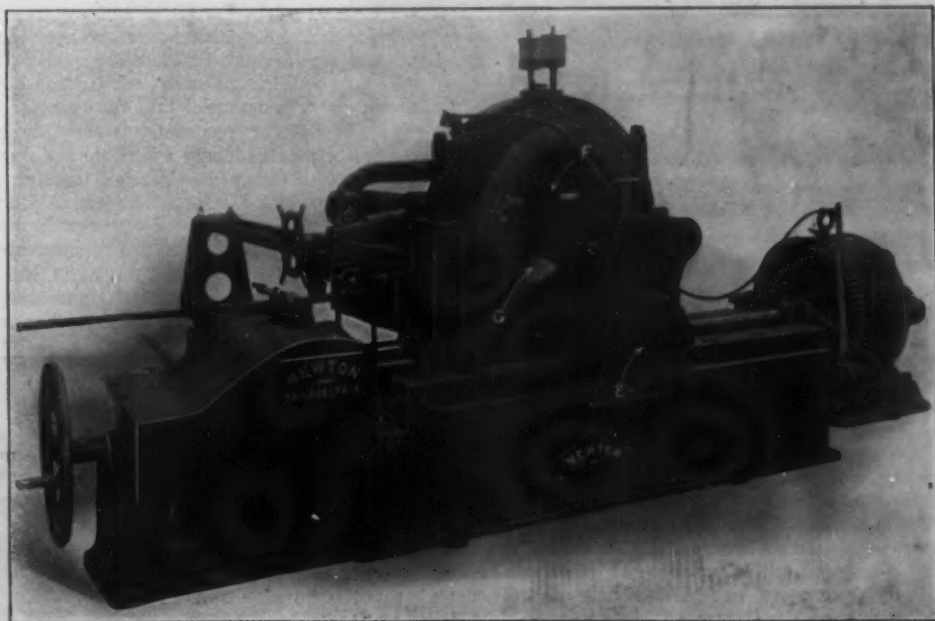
Rear View Showing Attachment for Keeping the Cut Pieces from Falling Into the Saw.
